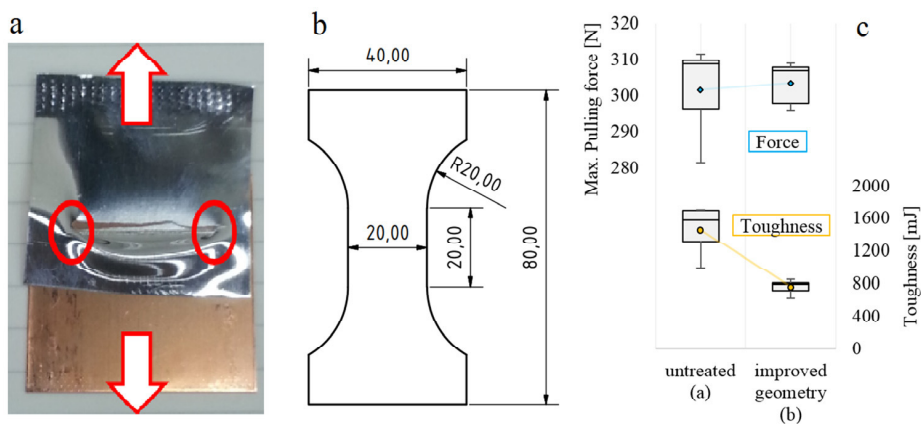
(a) crack starting from the weld seam ends; (b) improved sample geometry, achieved by punching; (c) enhanced accuracy of pull test of welded samples.
